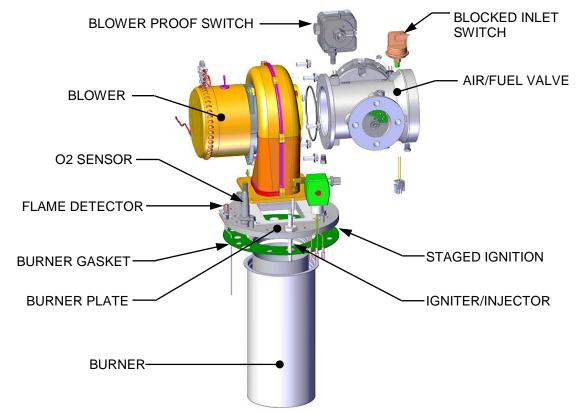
BMK 750/1000 Burner Assembly (Exploded View)
